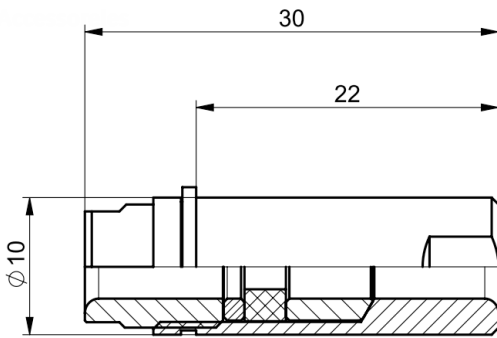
Adapter Type 1700A37B (for cable without protection)
